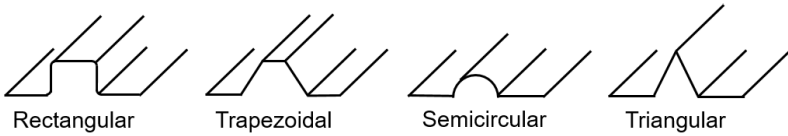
Typical bead cross sections adapted from Oehler and Draeger (1971)
